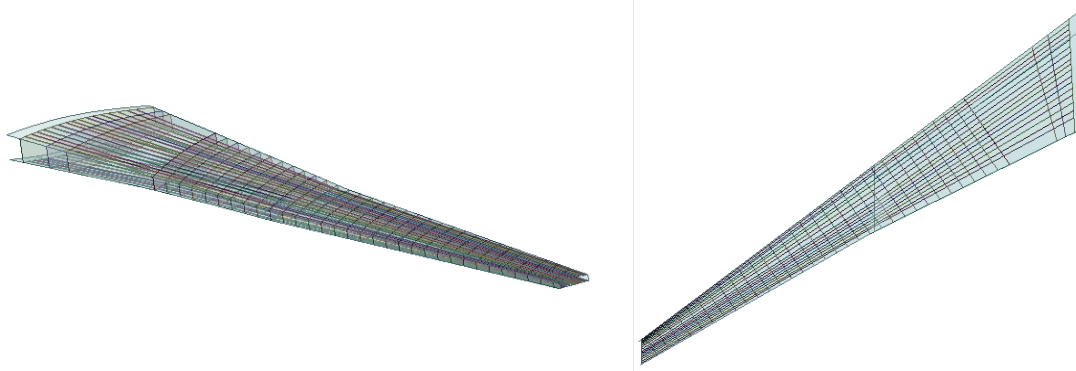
Structural layout of the rebuilt KC-135 wingbox
